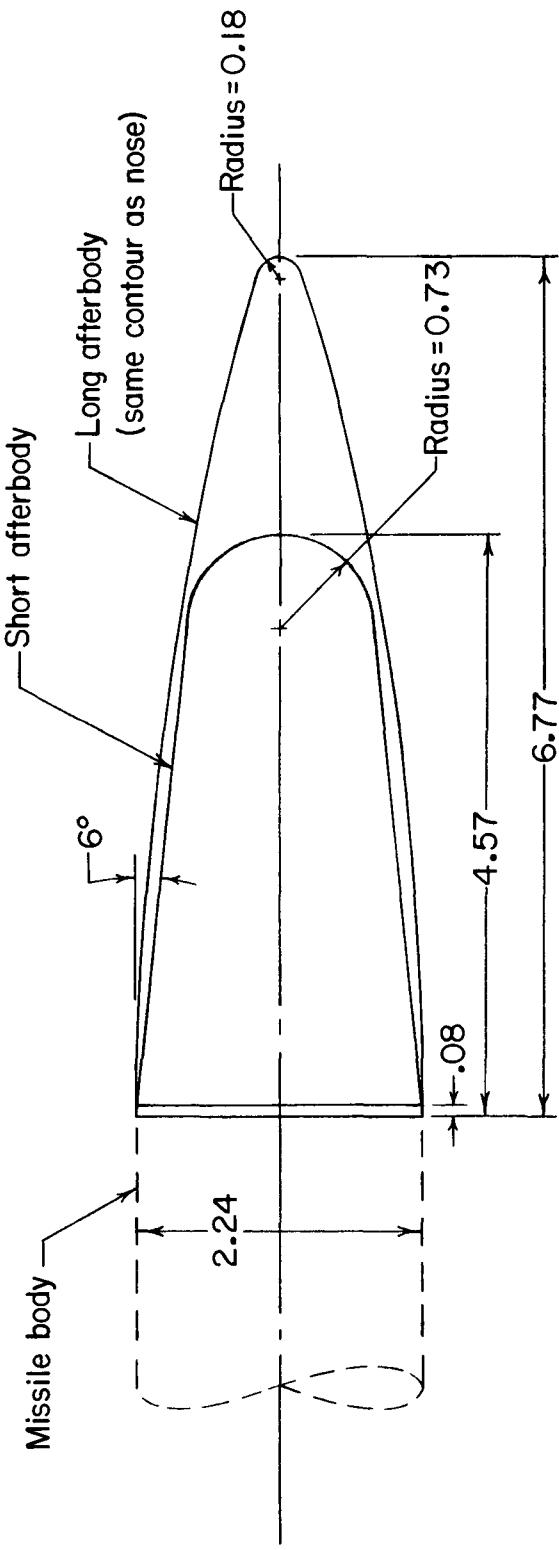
Geometrical details of missile afterbody closure fairings. All linear dimensions are in inches.
